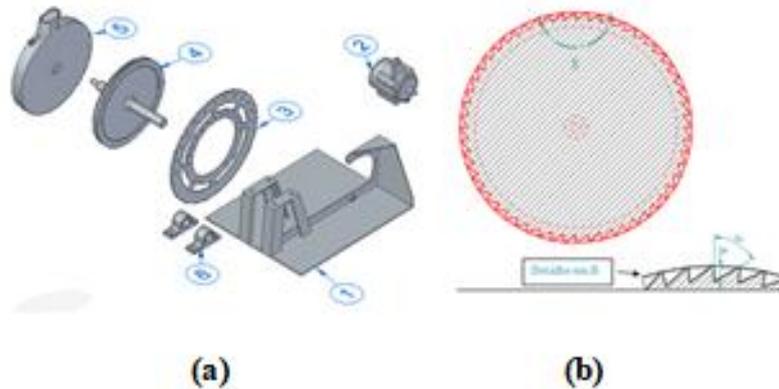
a) Constructive elements of the testing bench; b) detailing of the rotor blade.
